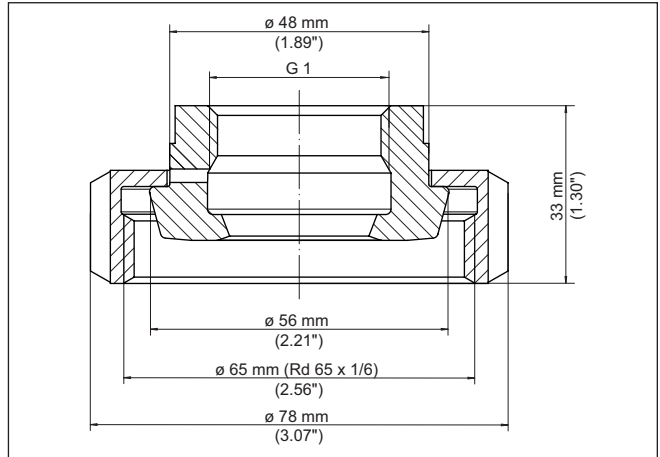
Dimensions hygienic adapter G1 (DIN 3852-X) on slotted nut DN 40 (DIN 11851) PN 40 - Cone seal
